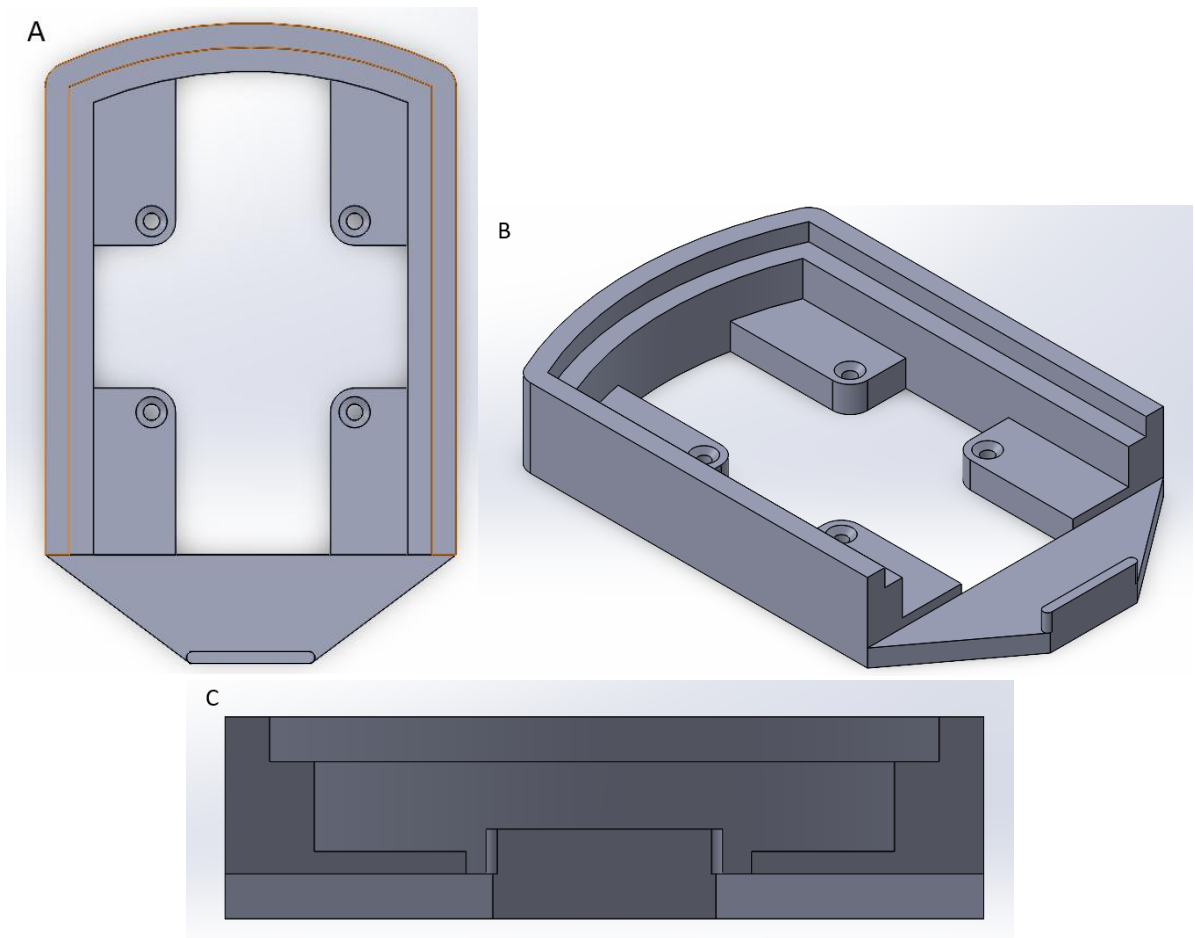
Base Part Holding Component Made Using SolidWorks, A – Top View; B – Diagonal View; C – Side View
